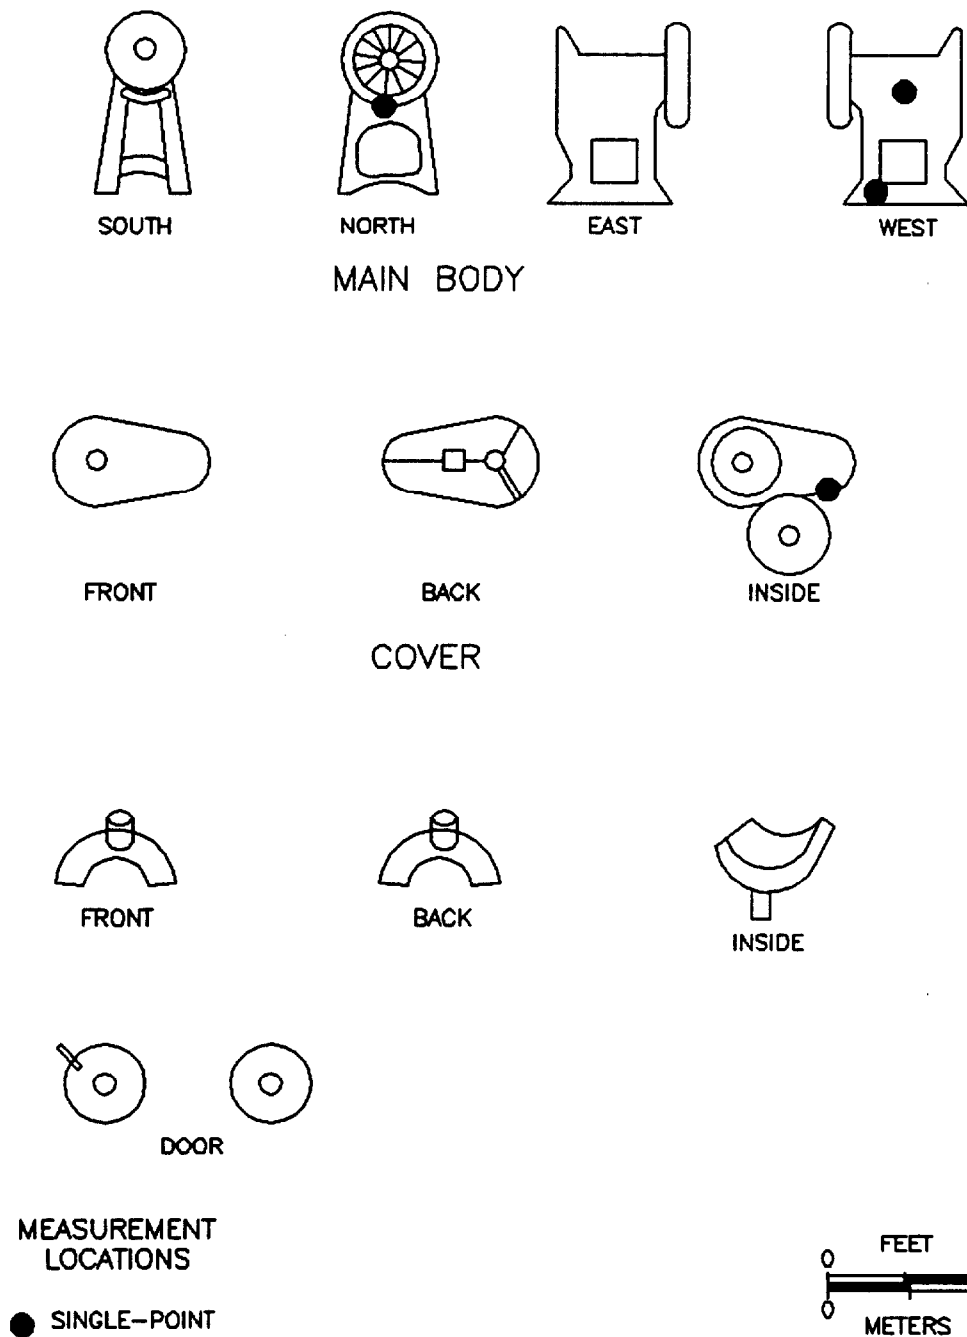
Building 30, Fabrication Room, Extruder #38348 - Measurement Locations
